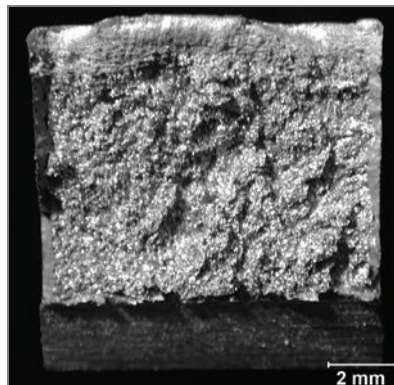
Macroscopic view of fracture in impact test sample made of the L35GSM steel after casting – brittle fracture
